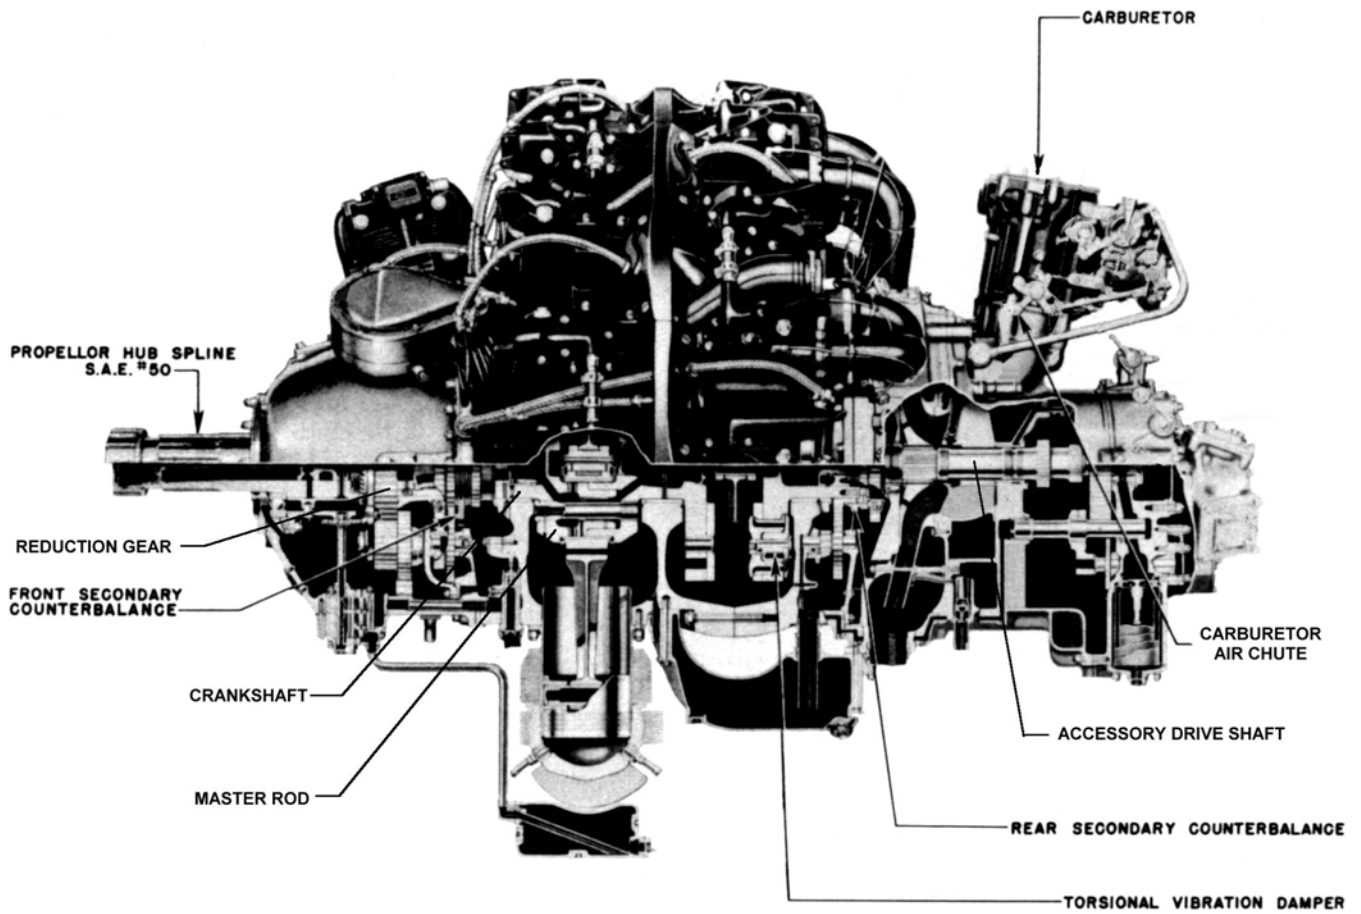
R-2800 Left Side View Showing Location of Parts Discussed in Later Chapters (Pratt & Whitney)
